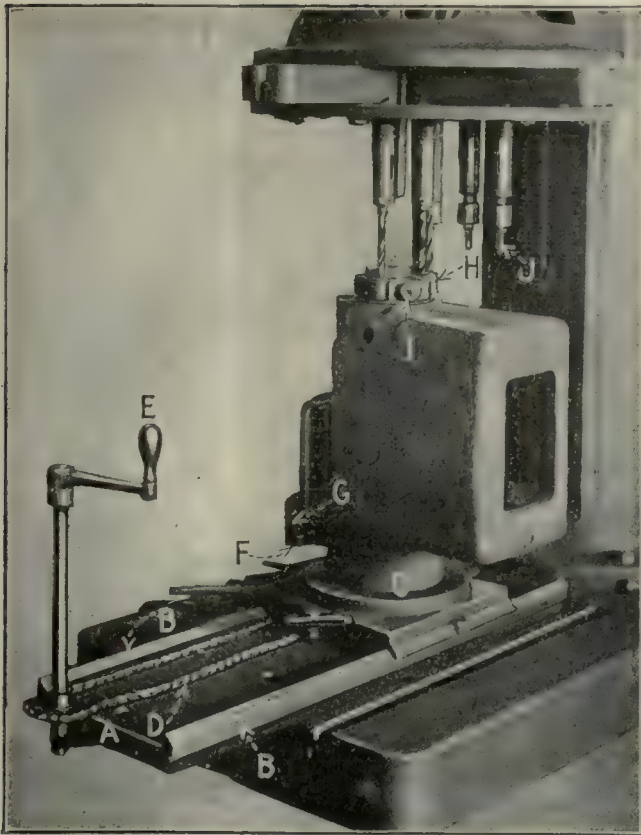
SLIDING SADDLE FOR SUPPORT OF DRILL JIG
